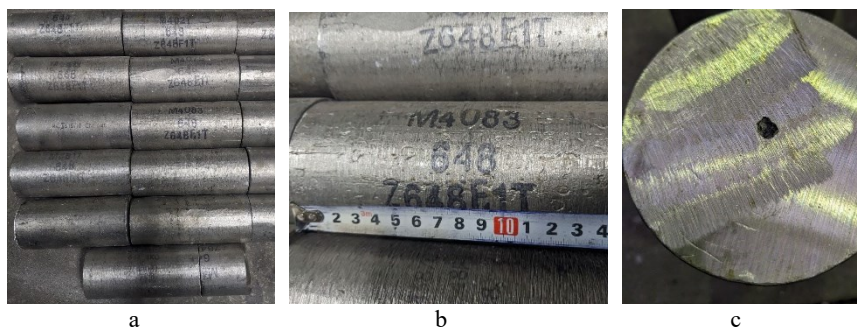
Billet, round log cut $d=70$ mm. a – General view of the billet, b – Billet with marking and size of the smallest length, c – billet defects.
